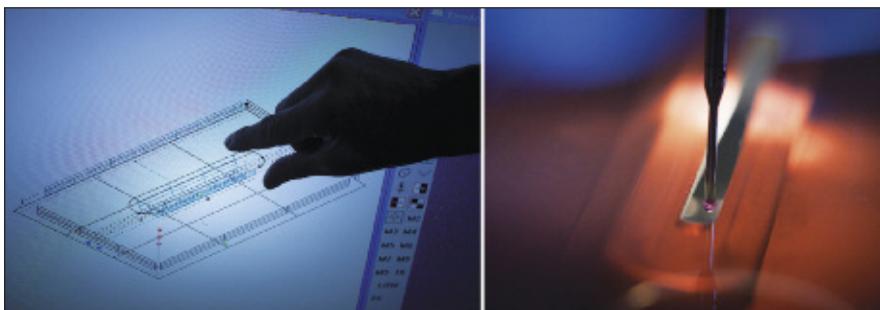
After machining, all dimensions are verified using a Starrett computer measurement machine (CMM) equipped with a touch probe that measures parts to within 2 microns.
